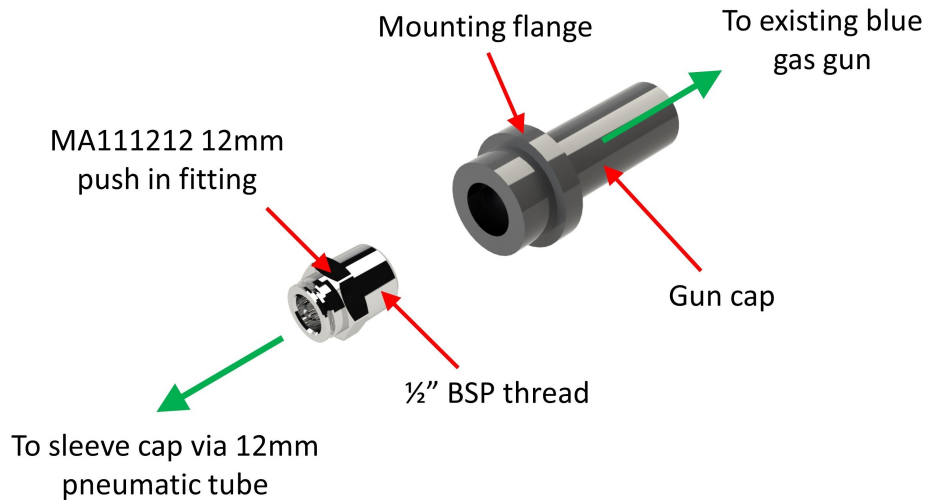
Isometric exploded view of the gun cap assembly for use on the existing blue gas gun at BISRU
